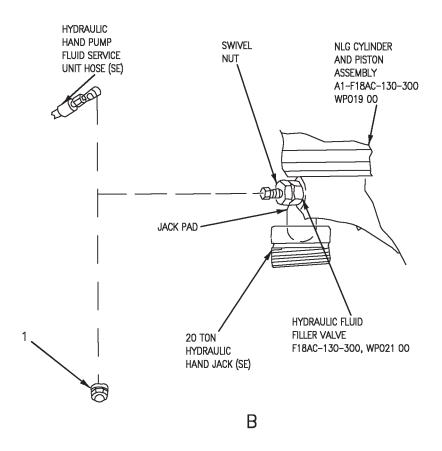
NLG Cylinder and Piston Assembly (Sheet 2)
